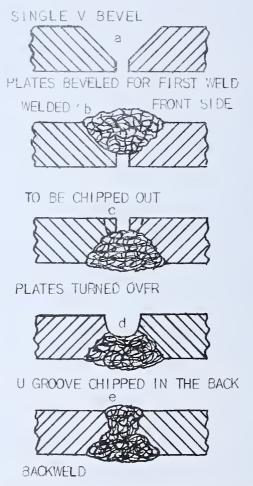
Steps in Making a Weld and a Backweld
